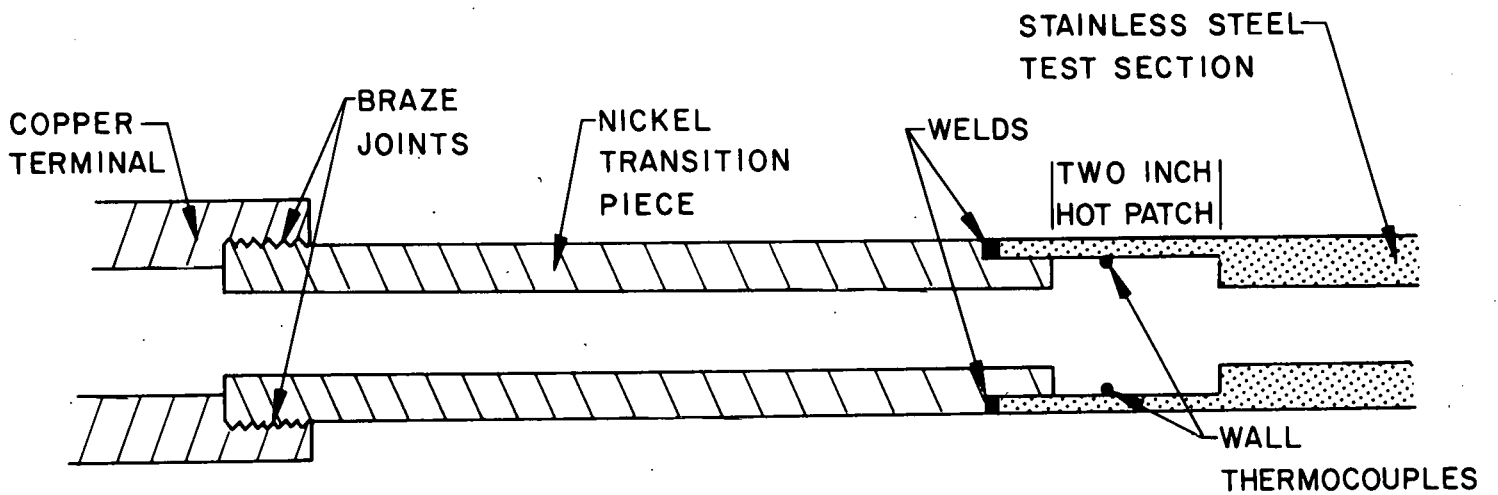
HEATED TUBE END CONNECTION DETAIL (NOT TO SCALE)
